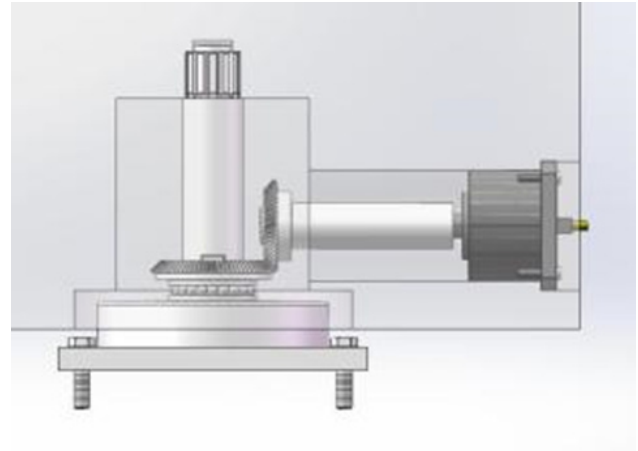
Base, vertical shaft, horizontal shaft, bevel gears (two), thrust ball bearings, motor (horizontal rotation adjustment)
